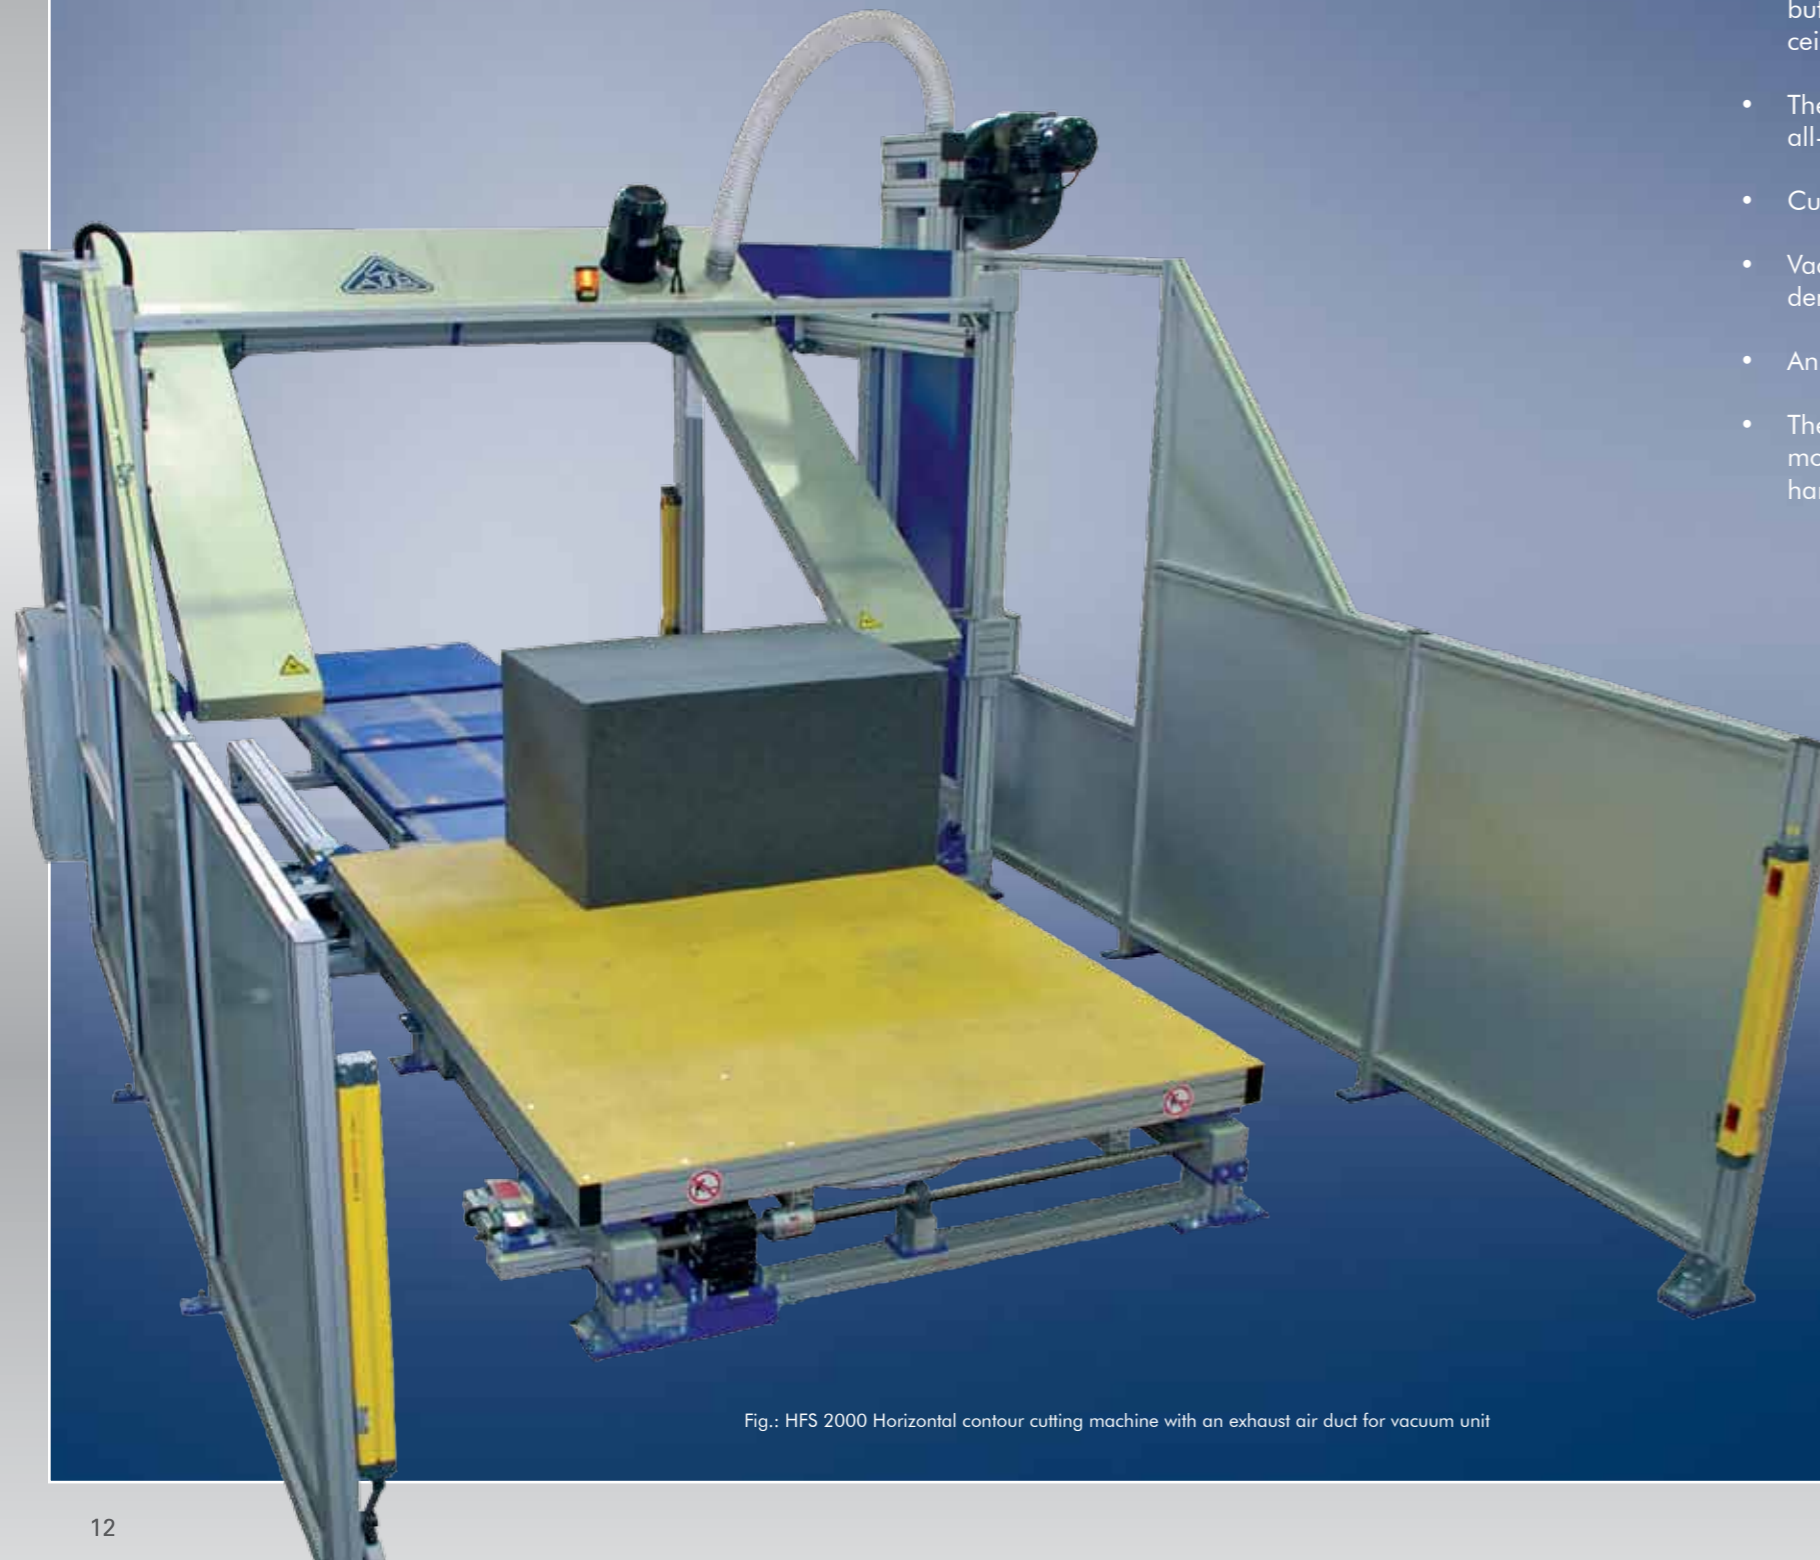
Horizontal contour cutting machine with an exhaust air duct for vacuum unit
